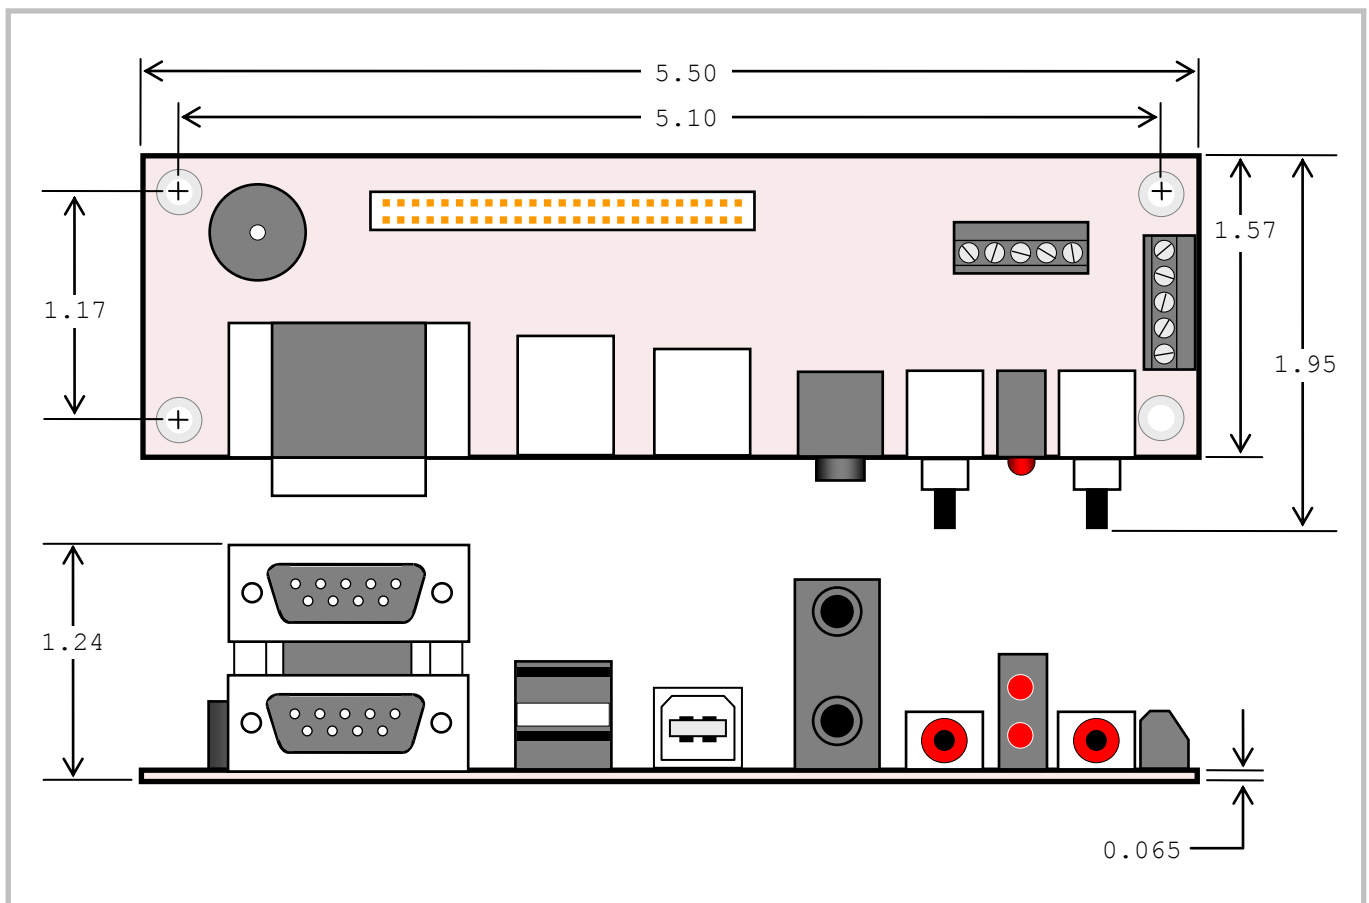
VL-CBR-5012 Dimensions and Mounting Holes
